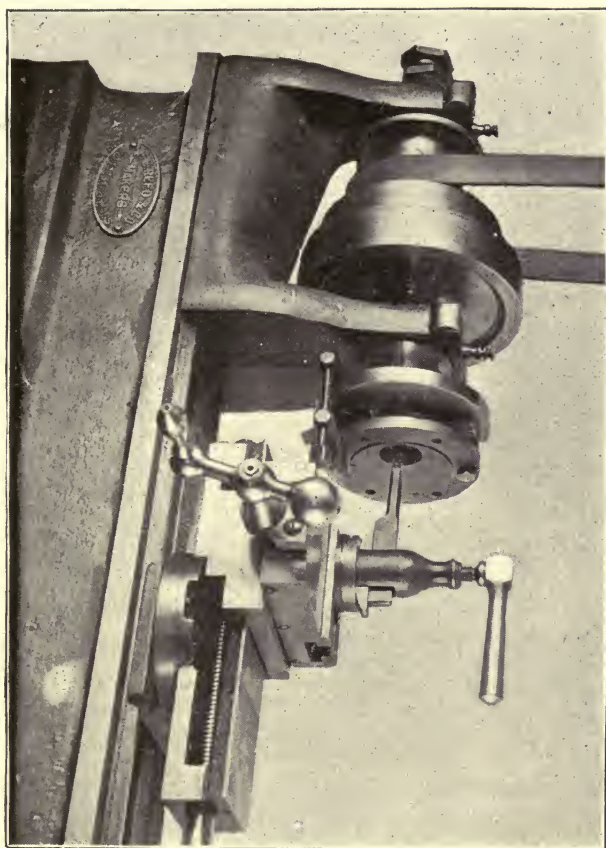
BORING CYLINDER HEAD FOR EXHAUST VALVE.
